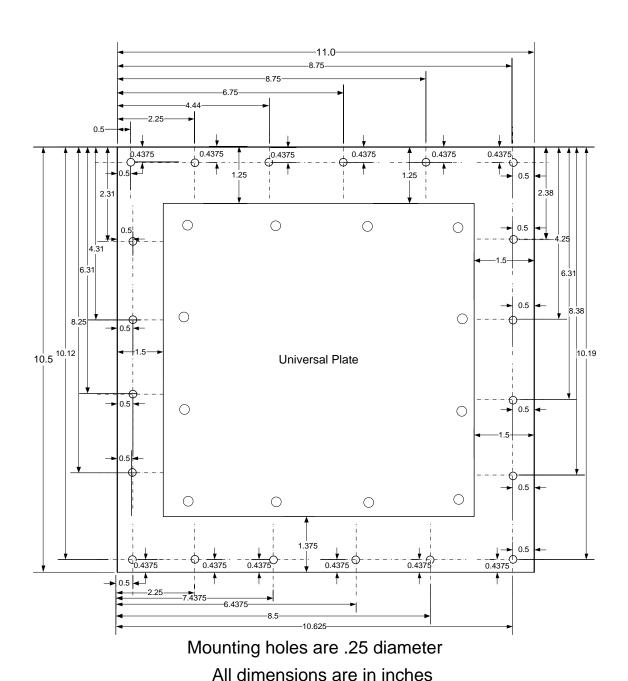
Waveguide Mounting Plate #1 Dimensions See Universal Plate Figure 7 for Inner Plate Dimensions
